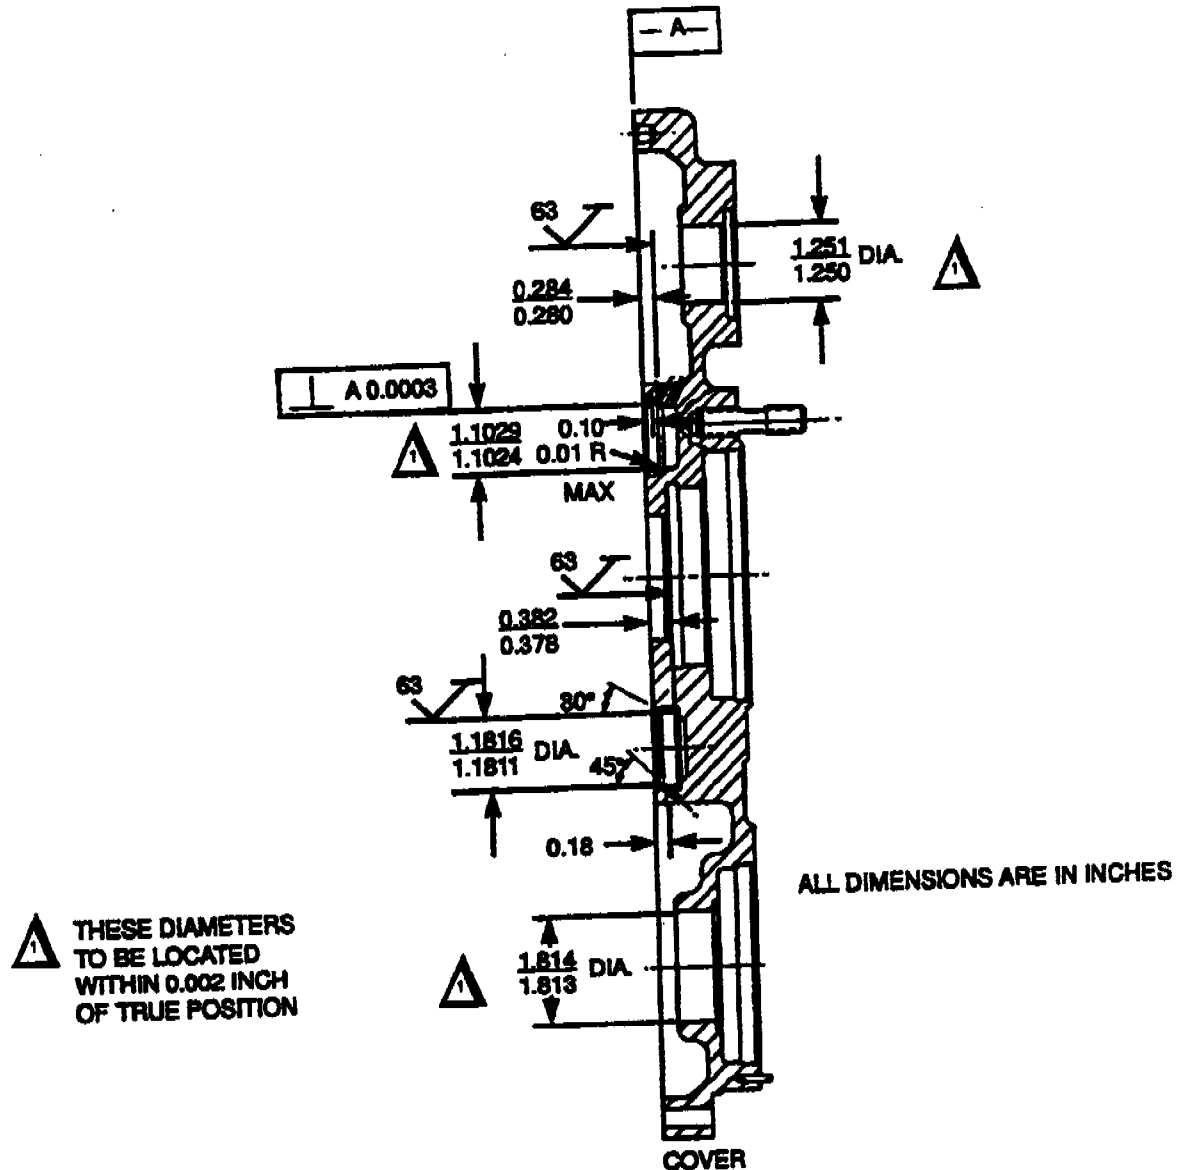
Accessory Drive Gearbox Bearing Liner Repair (English) (Sheet 1 of 2).
